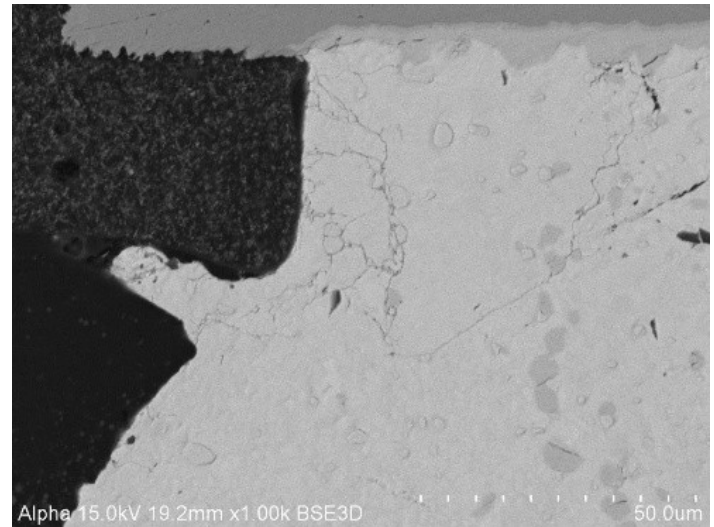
A cross section of the SAC305 BGA assembly after thermocycling showing SAC305 extrusion.
